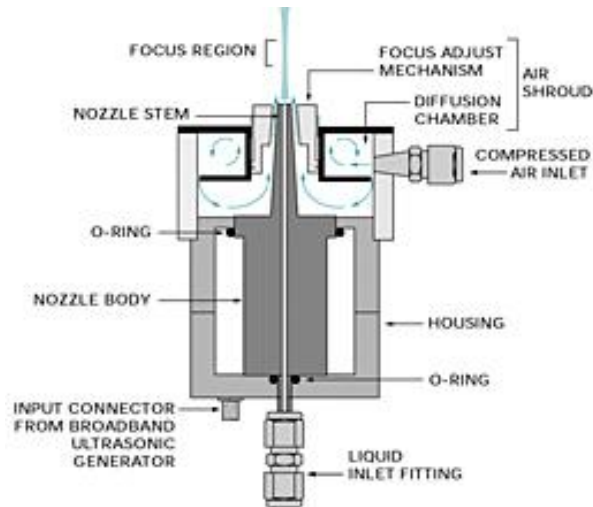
Ultrasonic nozzle cross-sectional view [30]
